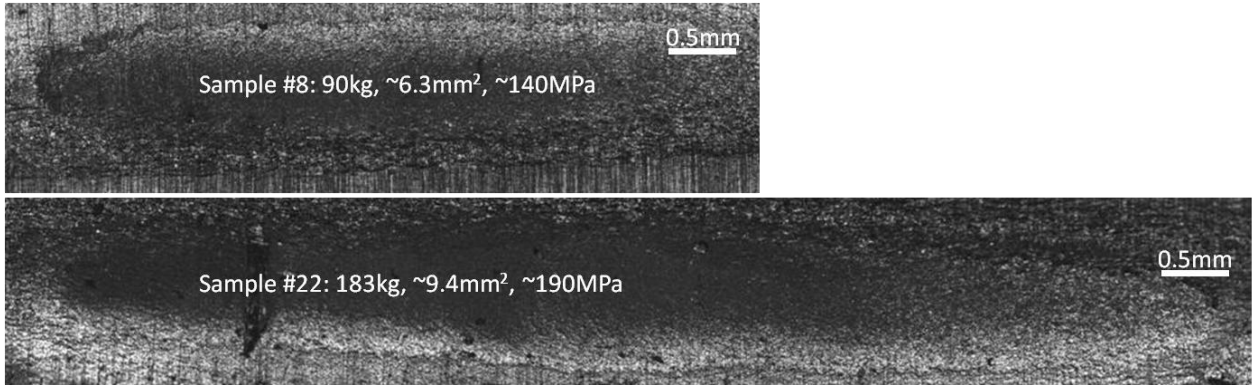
Selected sample fracture surfaces showing the size of bonded area.
